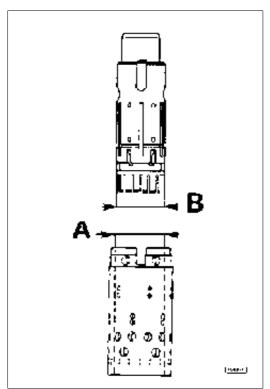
Fit diameter between internal and external elements of the control valve.
